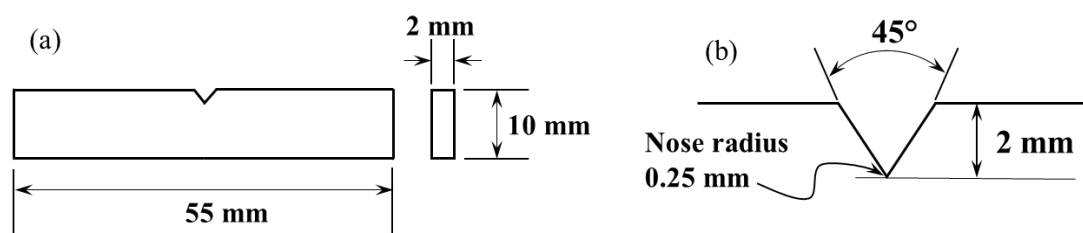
(a) Sub-size impact test specimen; (b) details of notch in the specimen
